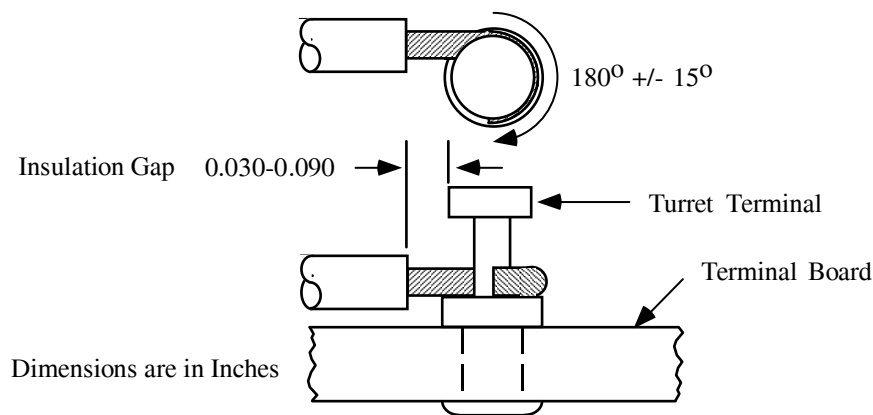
Single, Turret Terminal, Solder Profile.
